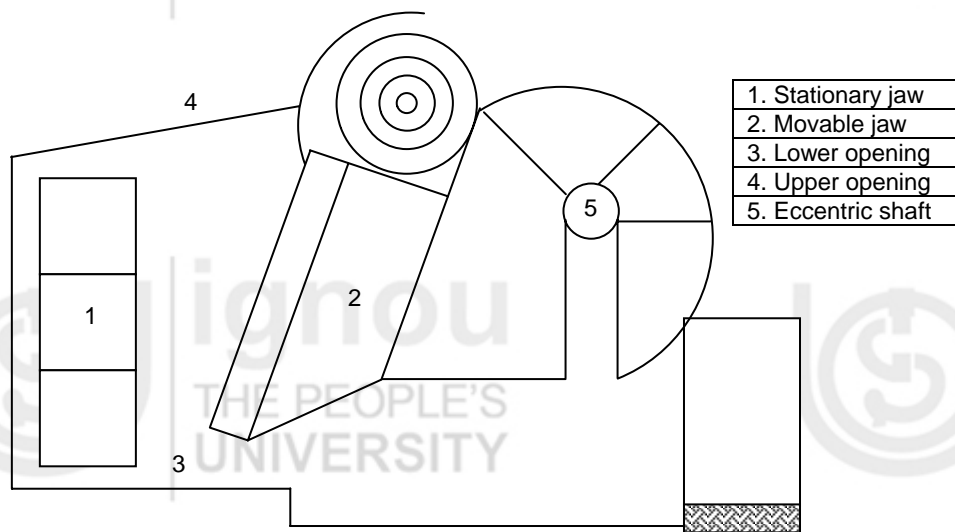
Blake-type Jaw Crusher – a Sketch
